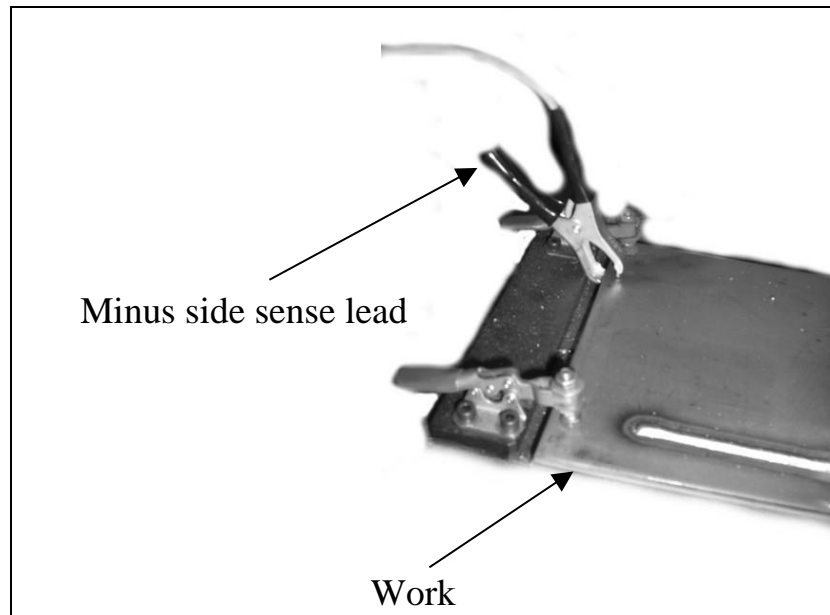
(i) Connection of welding power supply Power Wave R350, Power Wave R500 and Expansion module (5/5)
